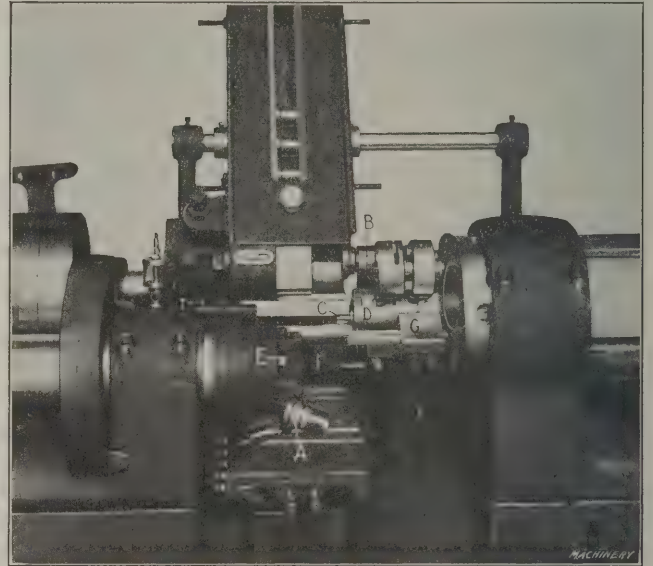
Cleveland Standard Model Turret Machine equipped with Magazine for Turning Part shown at A, Fig. 1
